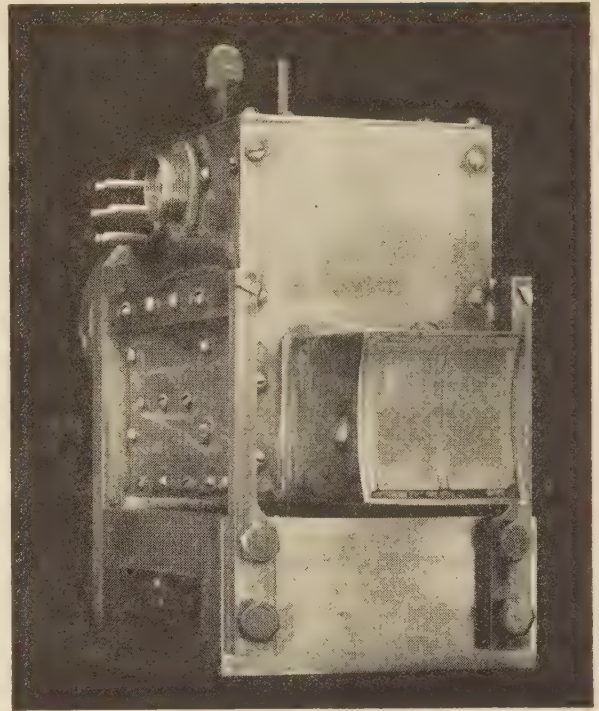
ONE "PROBE" OF SPINDLE-TESTING APPARATUS
